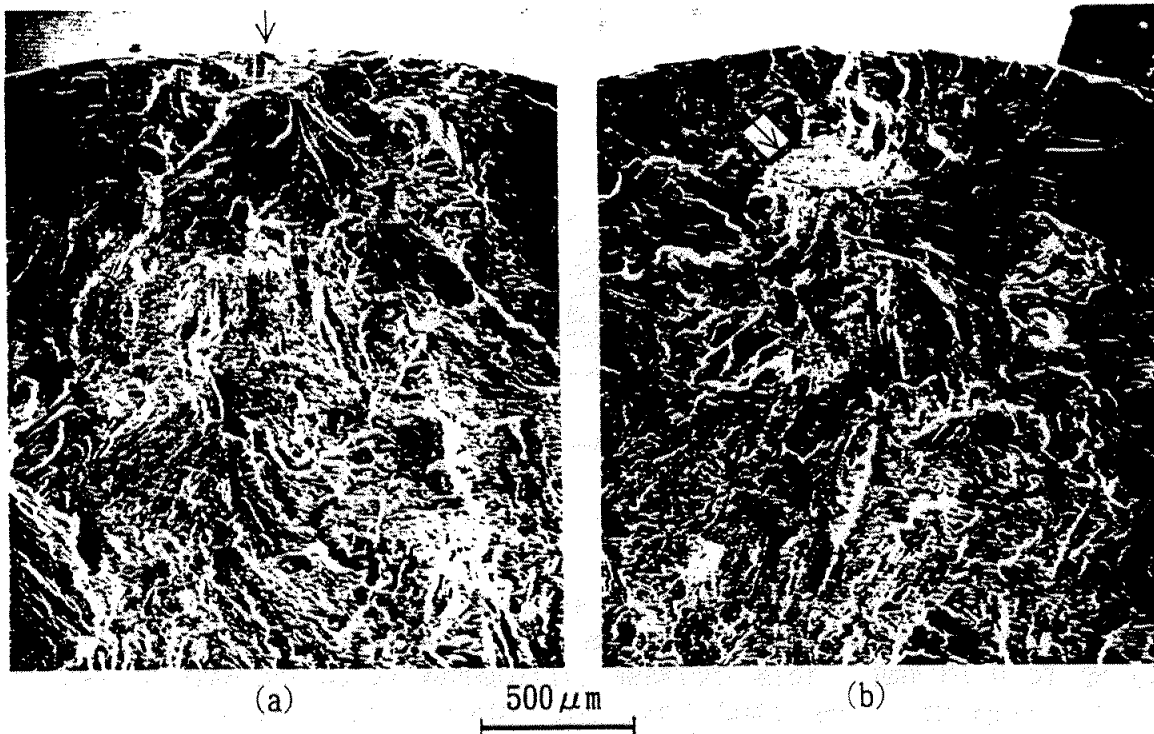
Examples of fractured surfaces in rotating-bending fatigue tests: (a) Surface crack initiation site in unpeened specimen; (b) Subsurface crack initiation site in specimen peened at Almen intensity of 0.44 mmN
